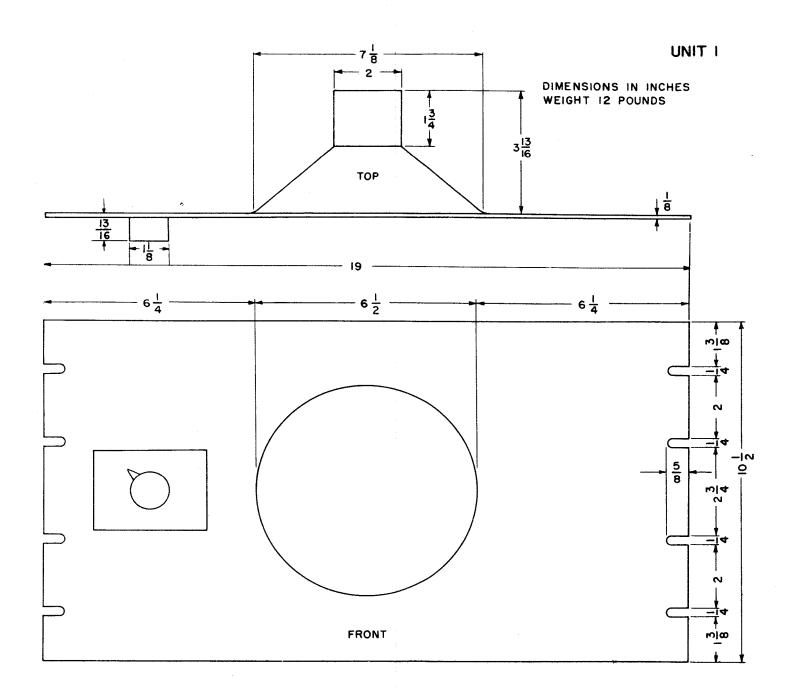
13. Loudspeaker LS—187/UR, Outline Dimensions
